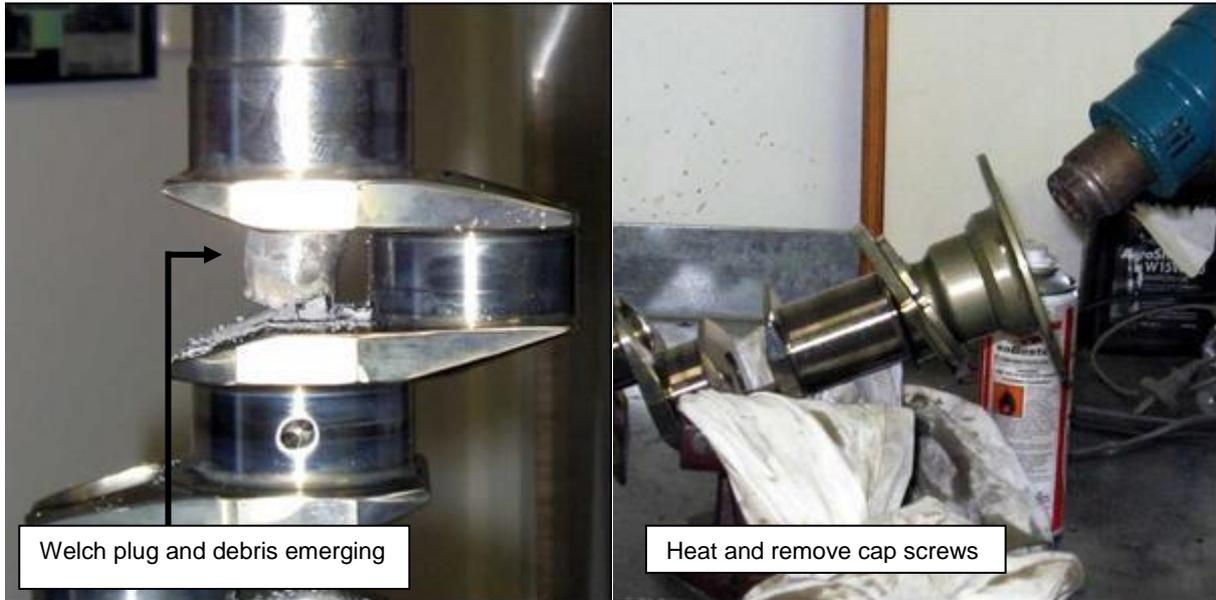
Welch Plug & Propeller Flange Removal From Crankshaft
